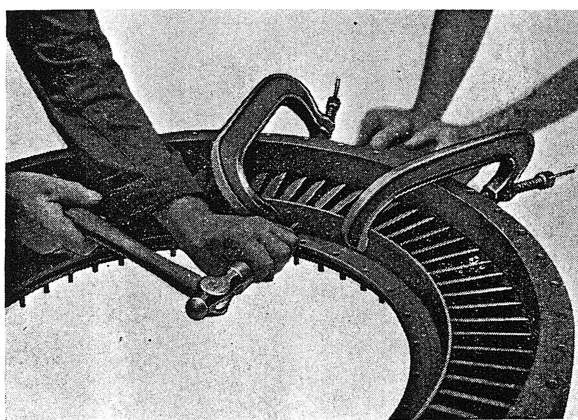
Nozzle ring clamped to the shrouds by two G. clamps when peening the pips of new blades
